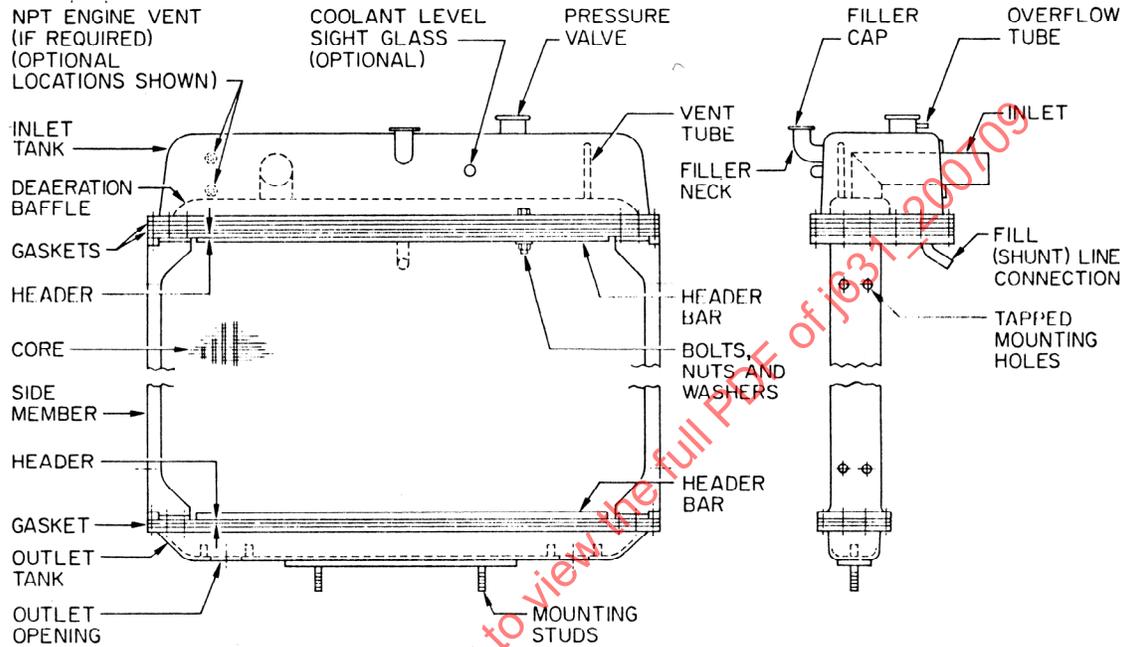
BOLTED TYPE RADIATOR, DRAWN TANKS (TYPICAL DEAERATION SYSTEM SHOWN)
